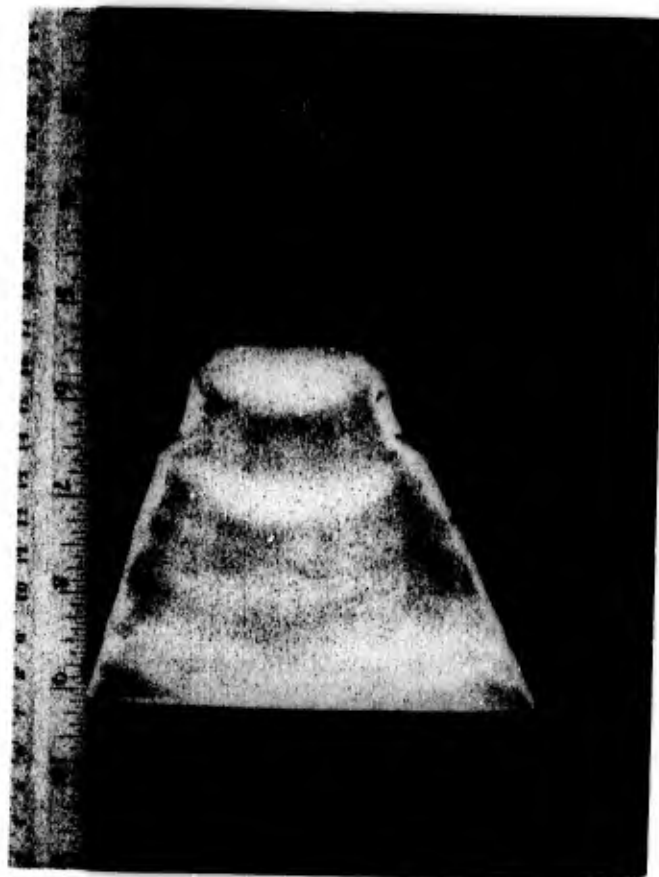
A prepared shoulder cut and fabricated from a large plate.
